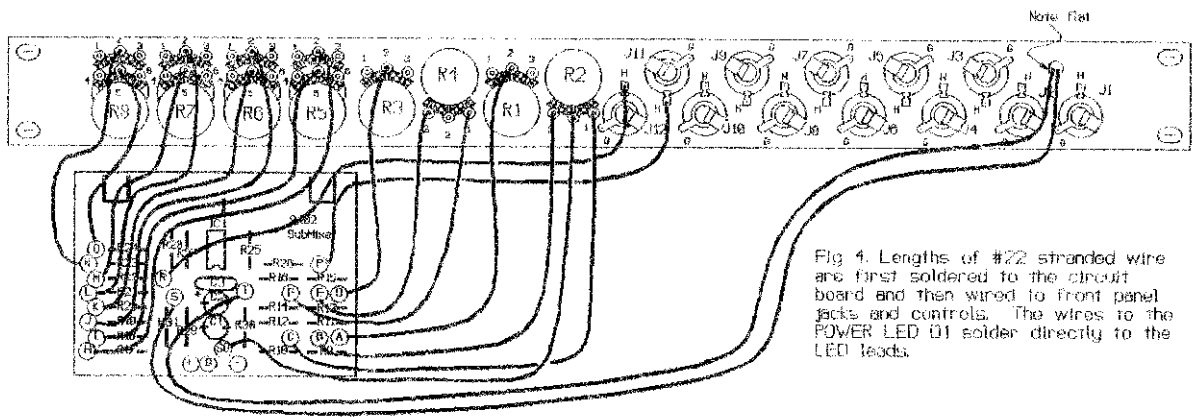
Lengths of #22 stranded wire are first soldered to the circuit board and then wired to front panel jacks and controls. The wires to the POWER LED U1 solder directly to the LED leads.
